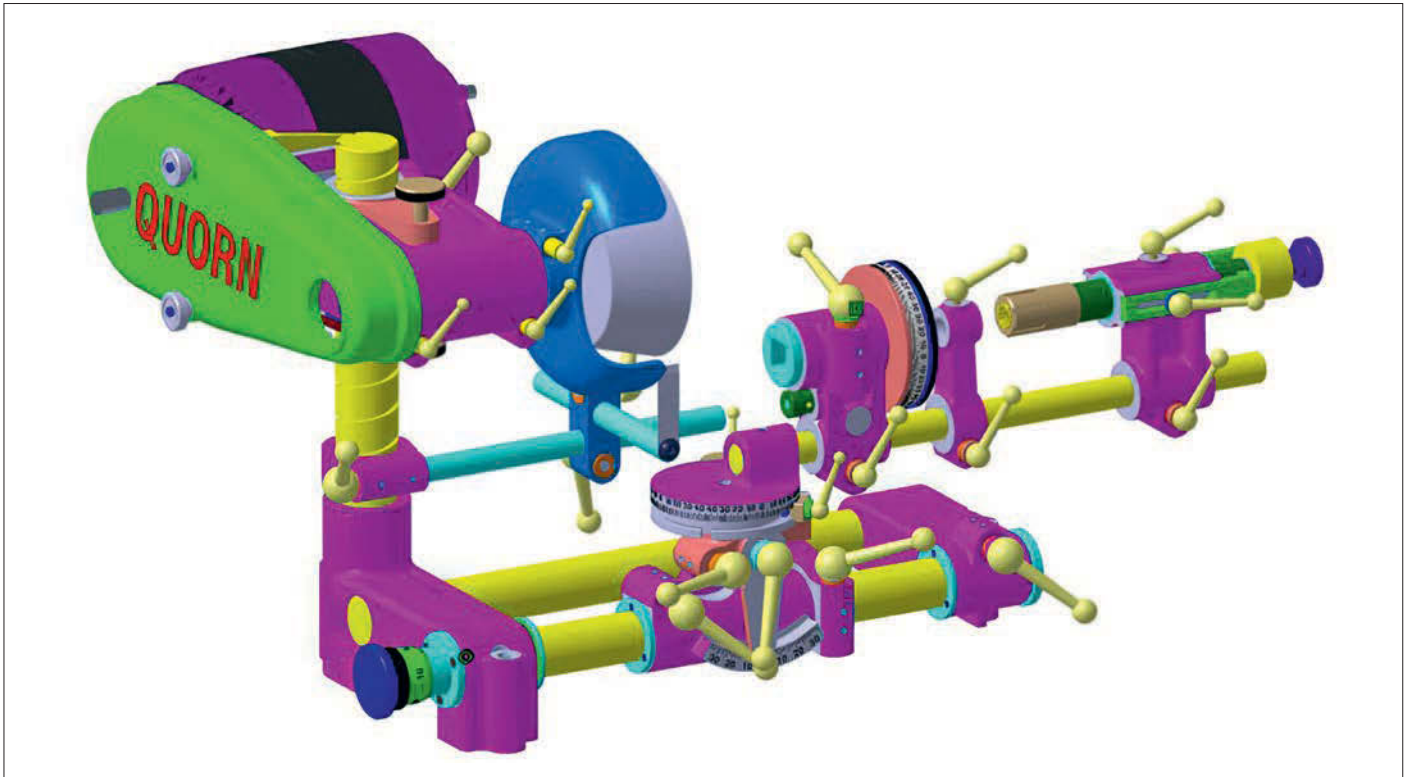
CAD model of my modified Quorn Mk1 universal tool and cutter grinder.
